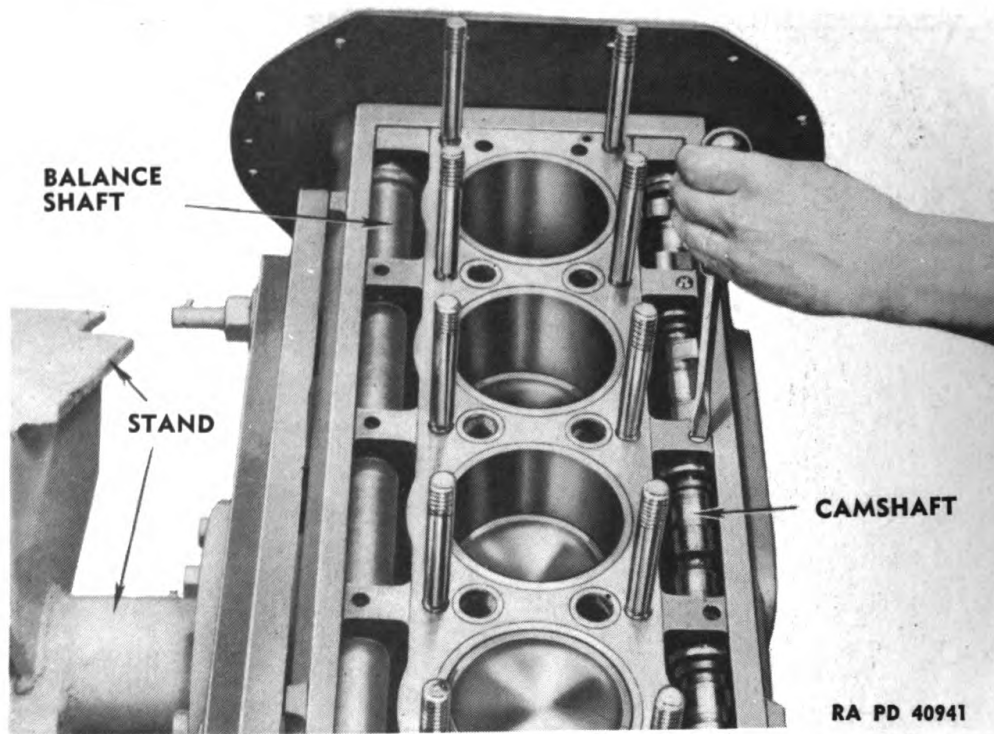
Removing Lock Screws from Intermediate Camshaft Bearings
